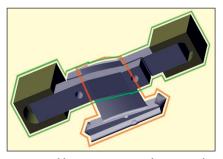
Alibre Design was used to create this CAD model of the weighted compressor blade assembly. The compressor blade is highlighted in orange and the weights and clamps are highlighted in green.
